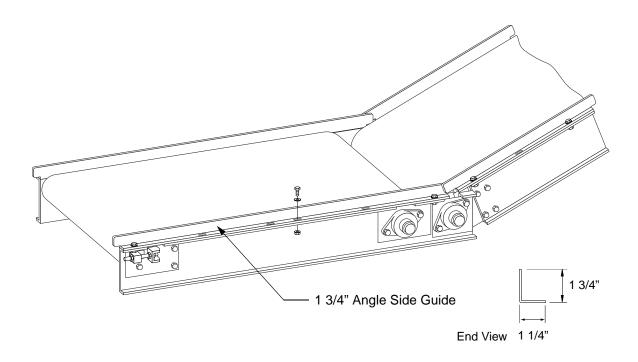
Power Feeder, Inclined, with 1 3/4" Angle Side Guides; Direct Mounting
